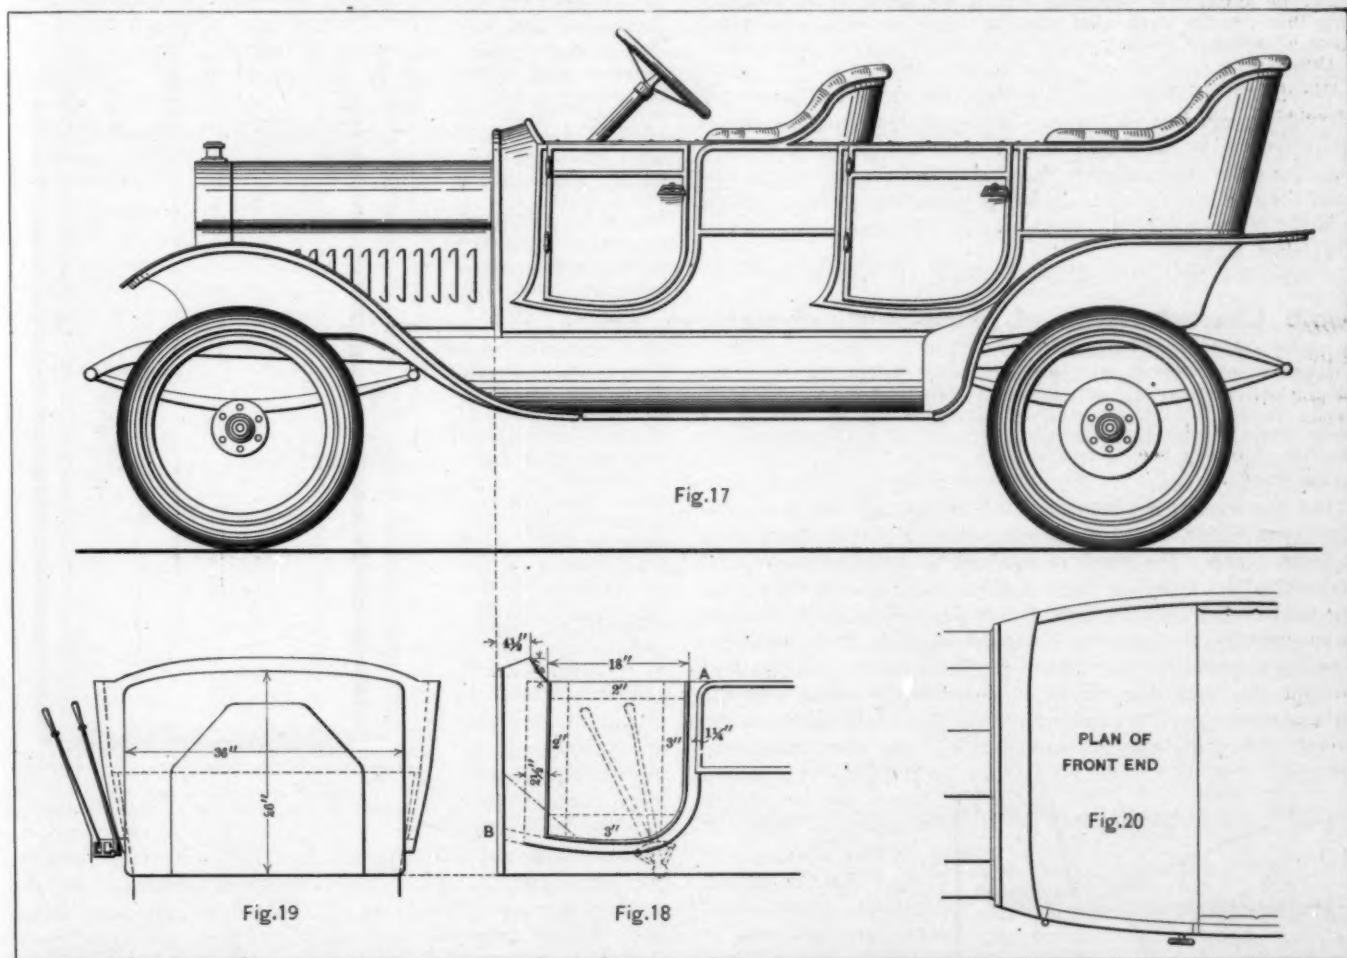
Model 17 Buick, with new fore-door type body replacing old touring style. Fig. 18—Detail of new fore-door. Fig. 19—Front elevation. Fig. 20—Plan
